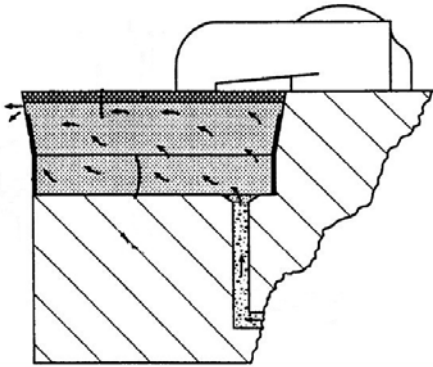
Cutting holder with cutting insert having internal cooling [6].
